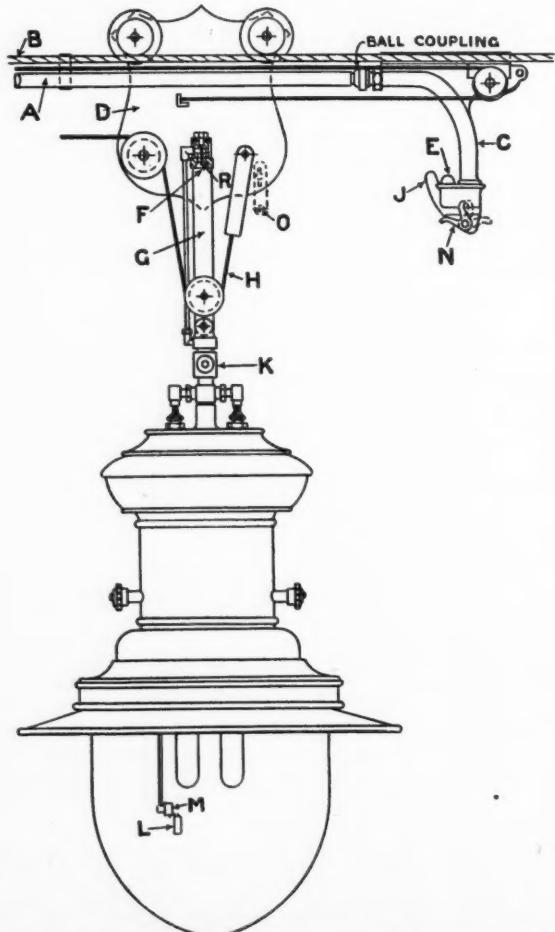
Sectional Drawing of a centrally hung High-pressure Gas Lamp, showing details of traversing gear.
